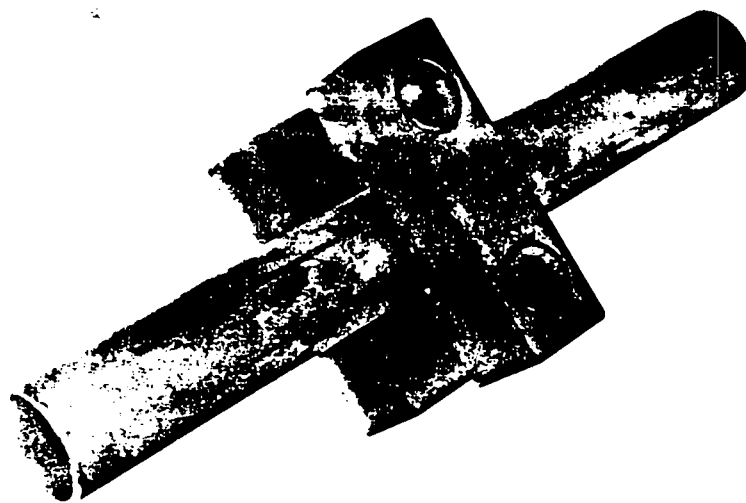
Clamped Specimen Used For Doped Steam Test
